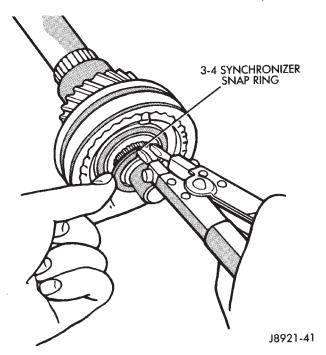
Remove 3-4 Synchronizer Snap Ring
